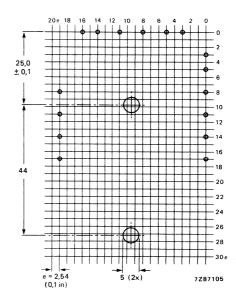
Hole pattern for mounting on a printed-wiring board (solder side). Grid hole diameter 1.3 ± 0.1 mm.
